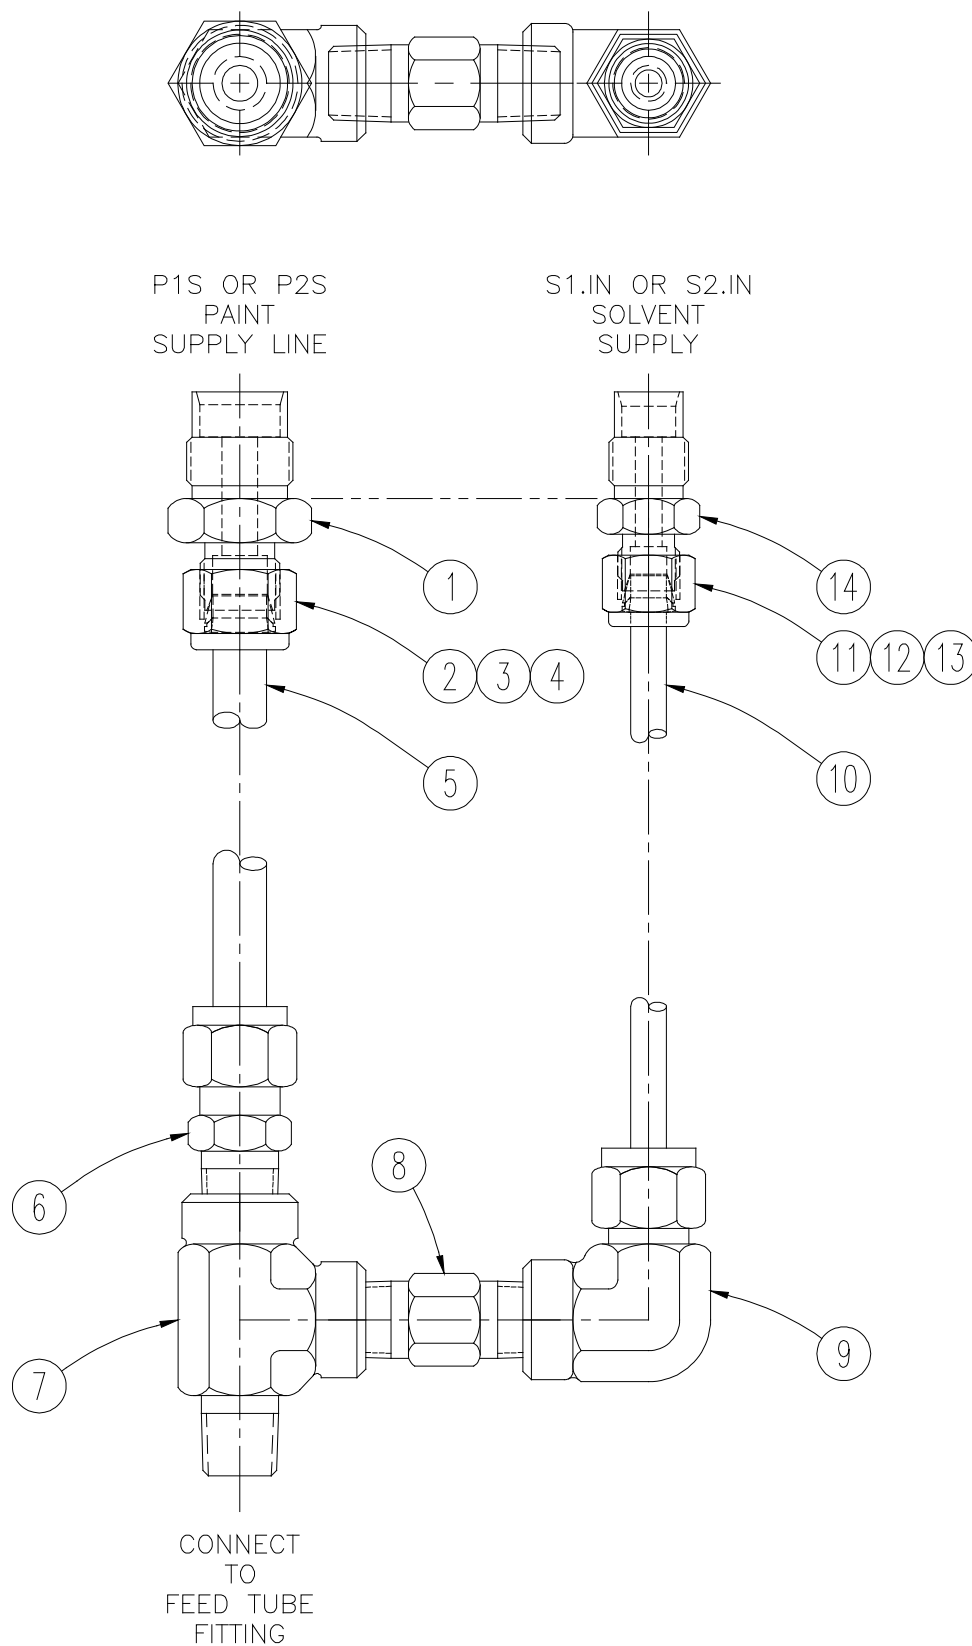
78732 Fluid Supply Line Package - Basic (No Valves)
